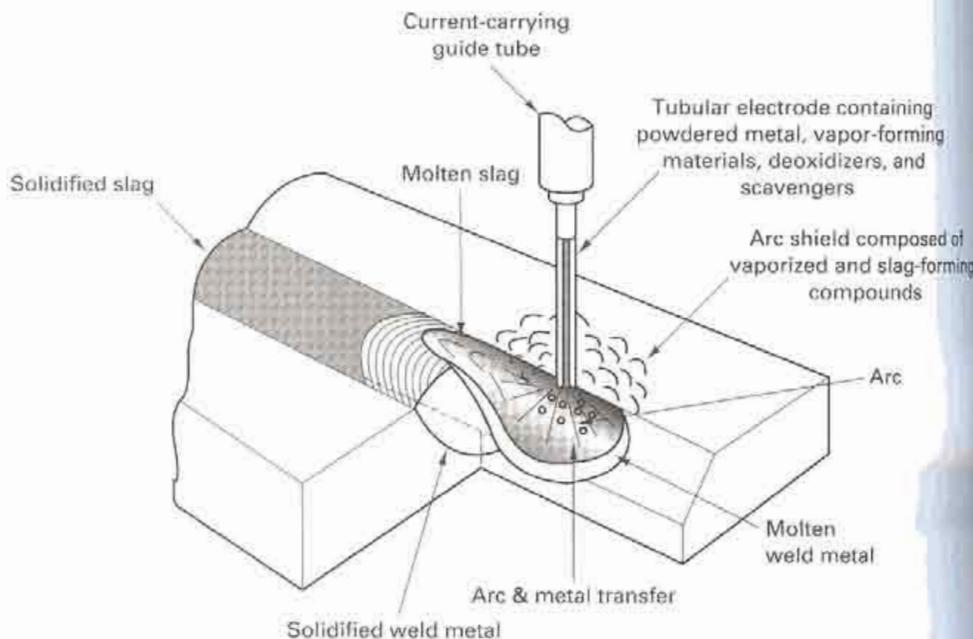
The flux-cored arc welding (FCAW) process.
